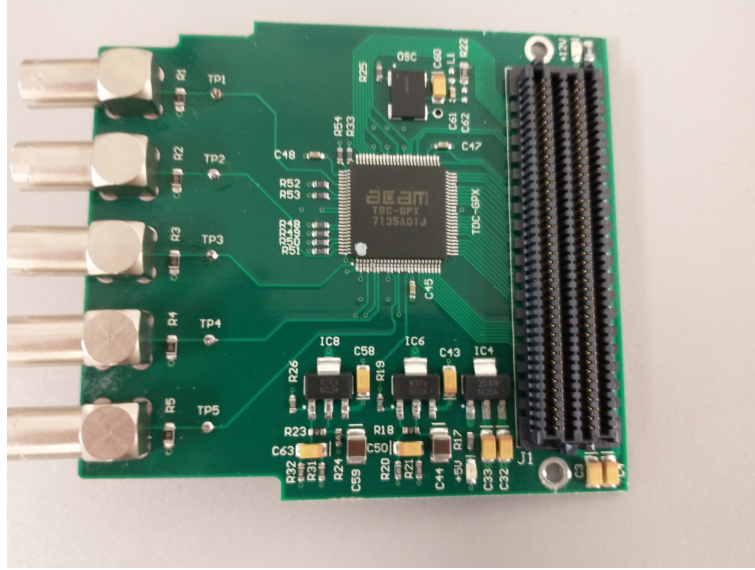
PCB housing the TDC-GPX. Resistors R1-R5 are desoldered for operation.
